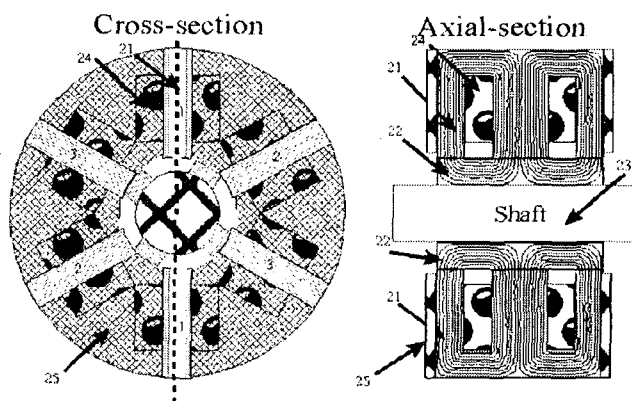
Cross- and axial-section of the E-core transverse flux machine. 21 – E-core section, 22 – Yoke section, 23 – Shaft, 24 – coil, 25 – End shield.
